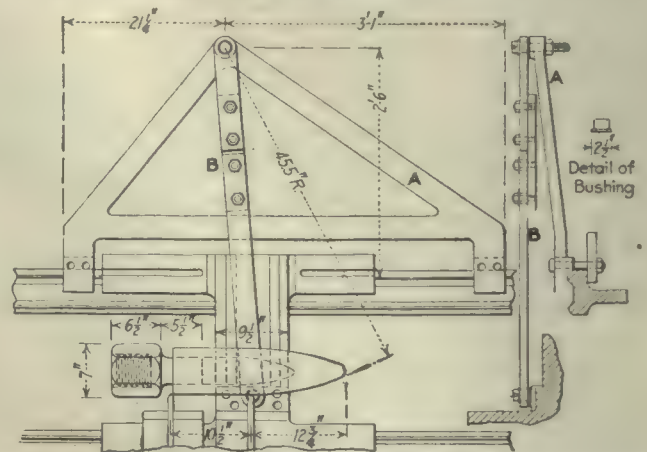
RADIUS-TURNING ATTACHMENT FOR HAMILTON LATHE. OPERATION 2
